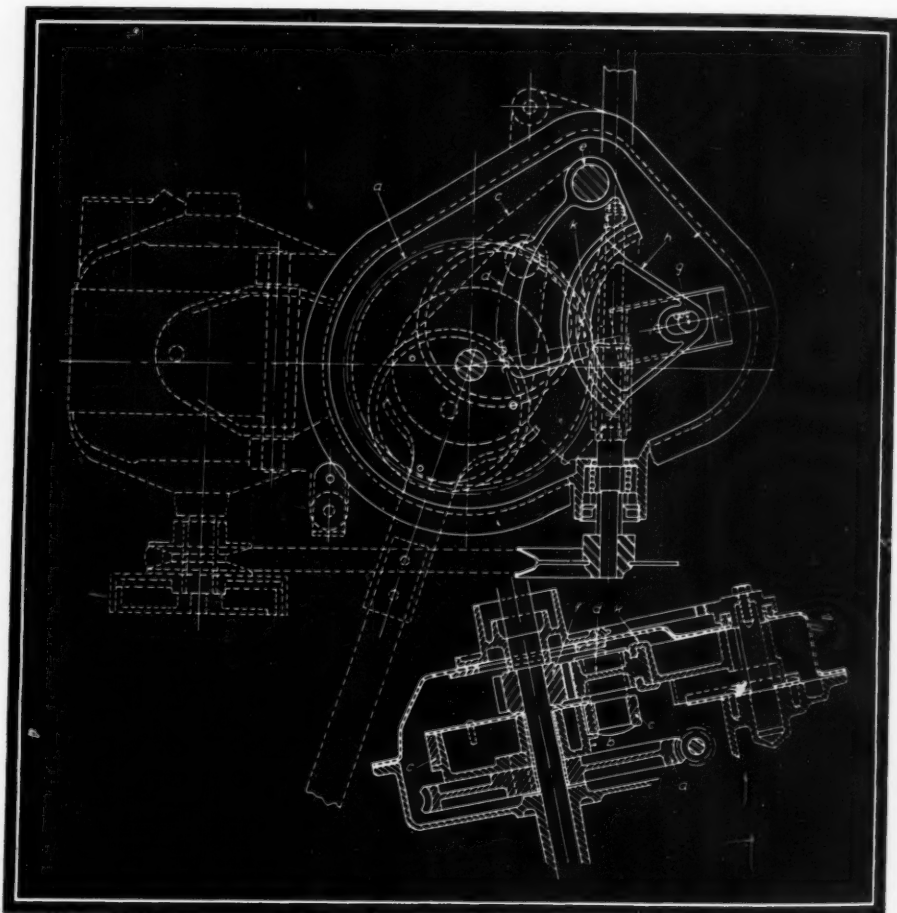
Mechanism employed in operating the agitator and shifting the circular rack into engagement
